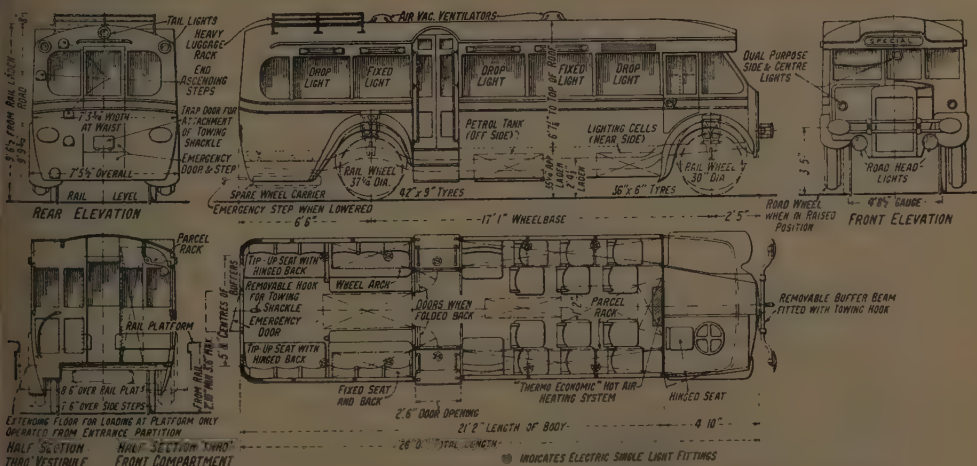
Elevations and plan of 26-seater London Midland & Scottish Railway Karrier "Ro-Railer".
